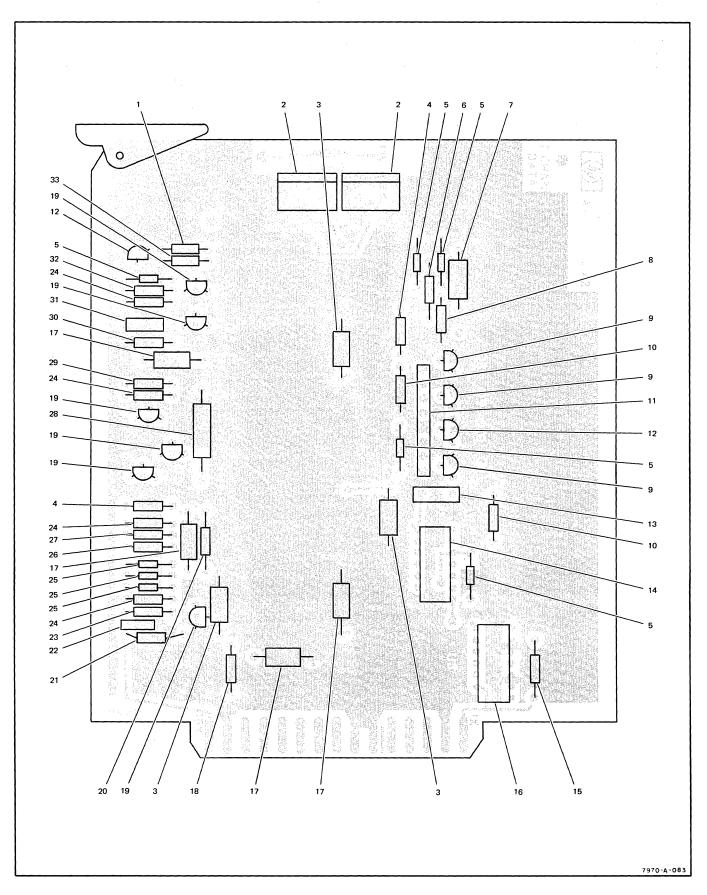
Single-Channel Read Data PC Assembly (21 - 45 IPS)
